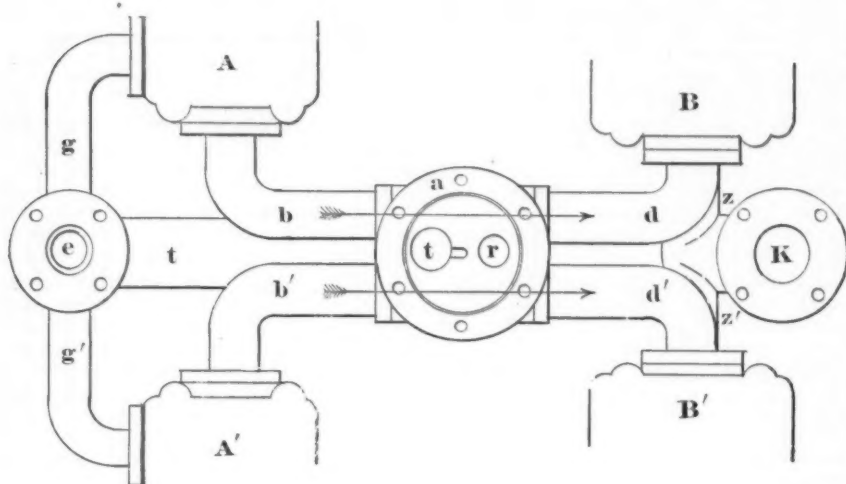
Plan View of Switching Valves and Connecting Pipes.
